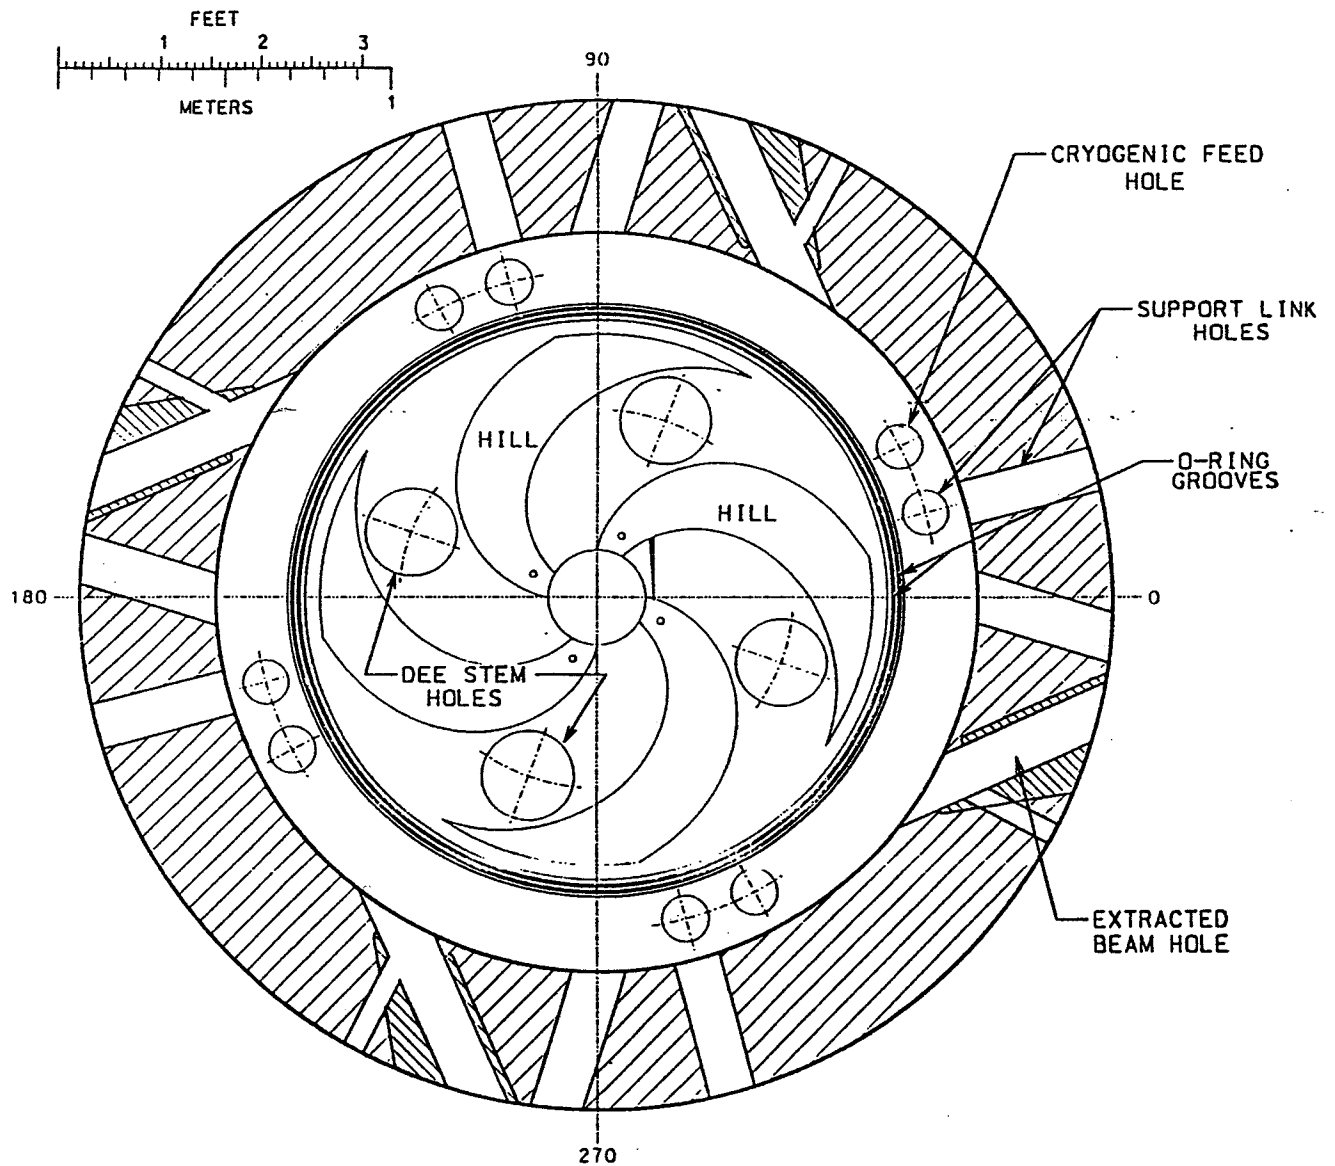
Plan view showing the many median plane penetrations through the outer yoke rings, the large holes penetrating the cap, and the basic hill layout.
